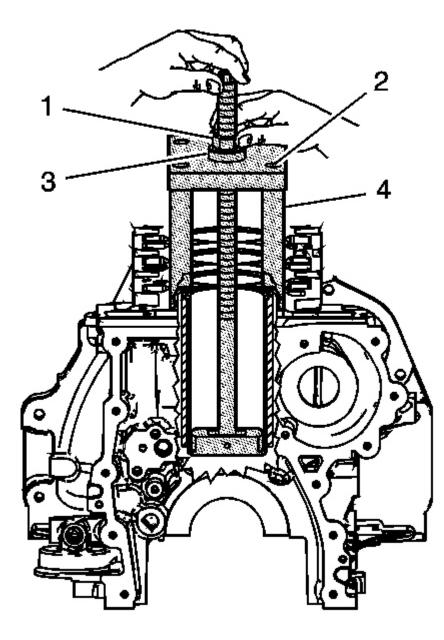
View Of Cylinder Bore Sleeve Puller EN 45680-402 Courtesy of GENERAL MOTORS CORP.
